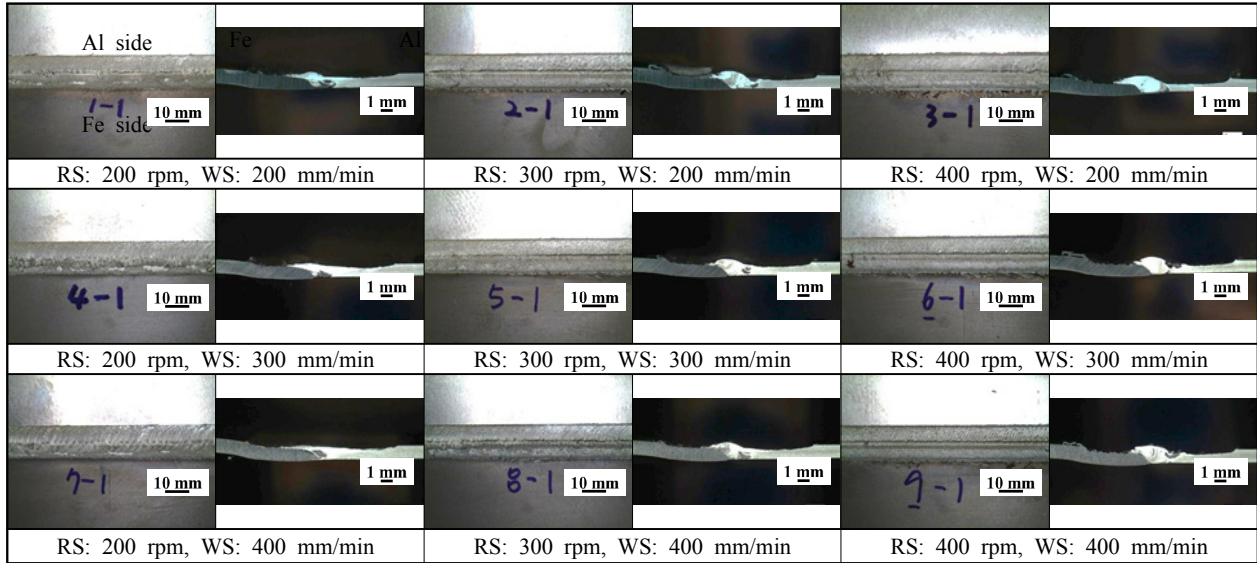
Weld bead surfaces and cross-sections according to welding parameters (1.0 mm-thick specimen, RS: tool rotation speed, and WS: welding speed)
